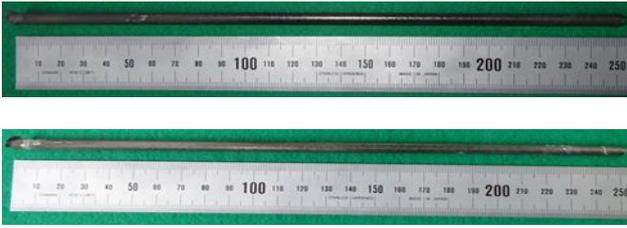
U-10wt.%Zr metallic fuel fabricated by injection casting with a varied process parameters.
